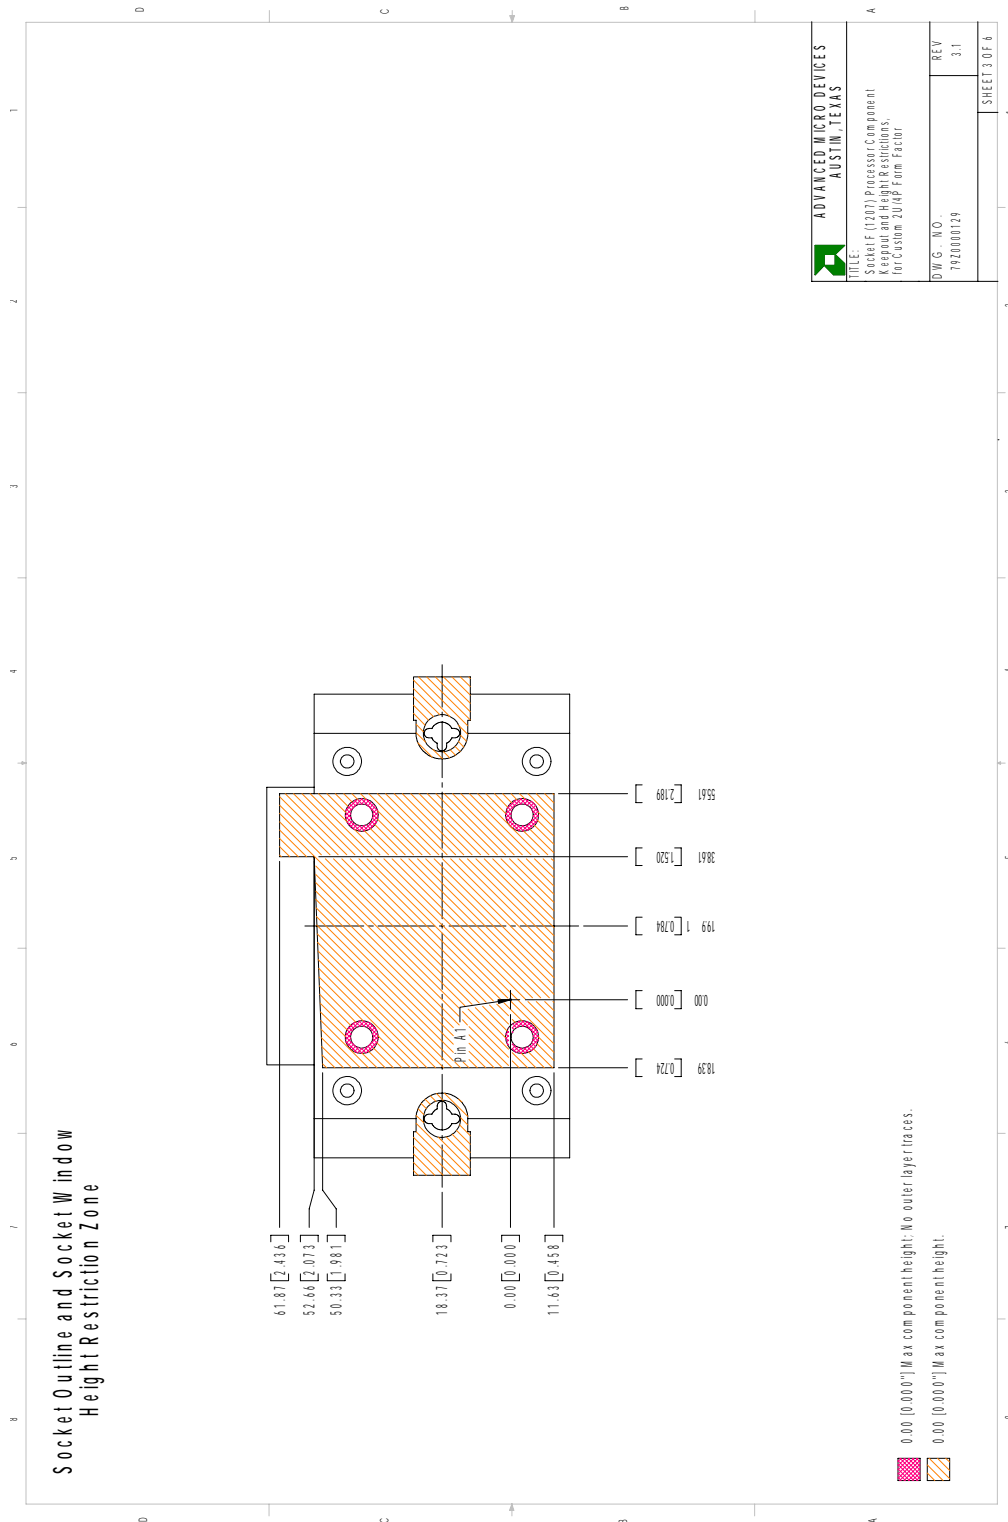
Socket F (1207) 2U-4P Socket Outline and Socket Window
